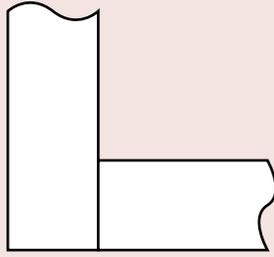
Flux Cored Arc Welding of Plain Carbon and Low Alloy Steels Using External Shielding Gas
